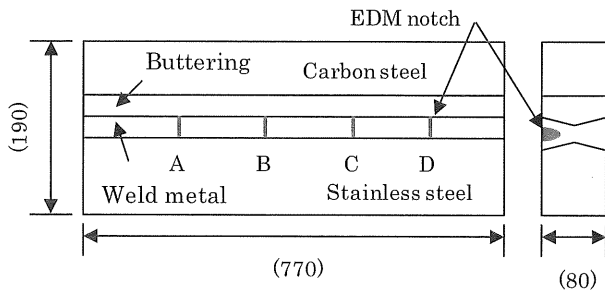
Nickel based alloy weld specimen with EDM notches in butt weld area
